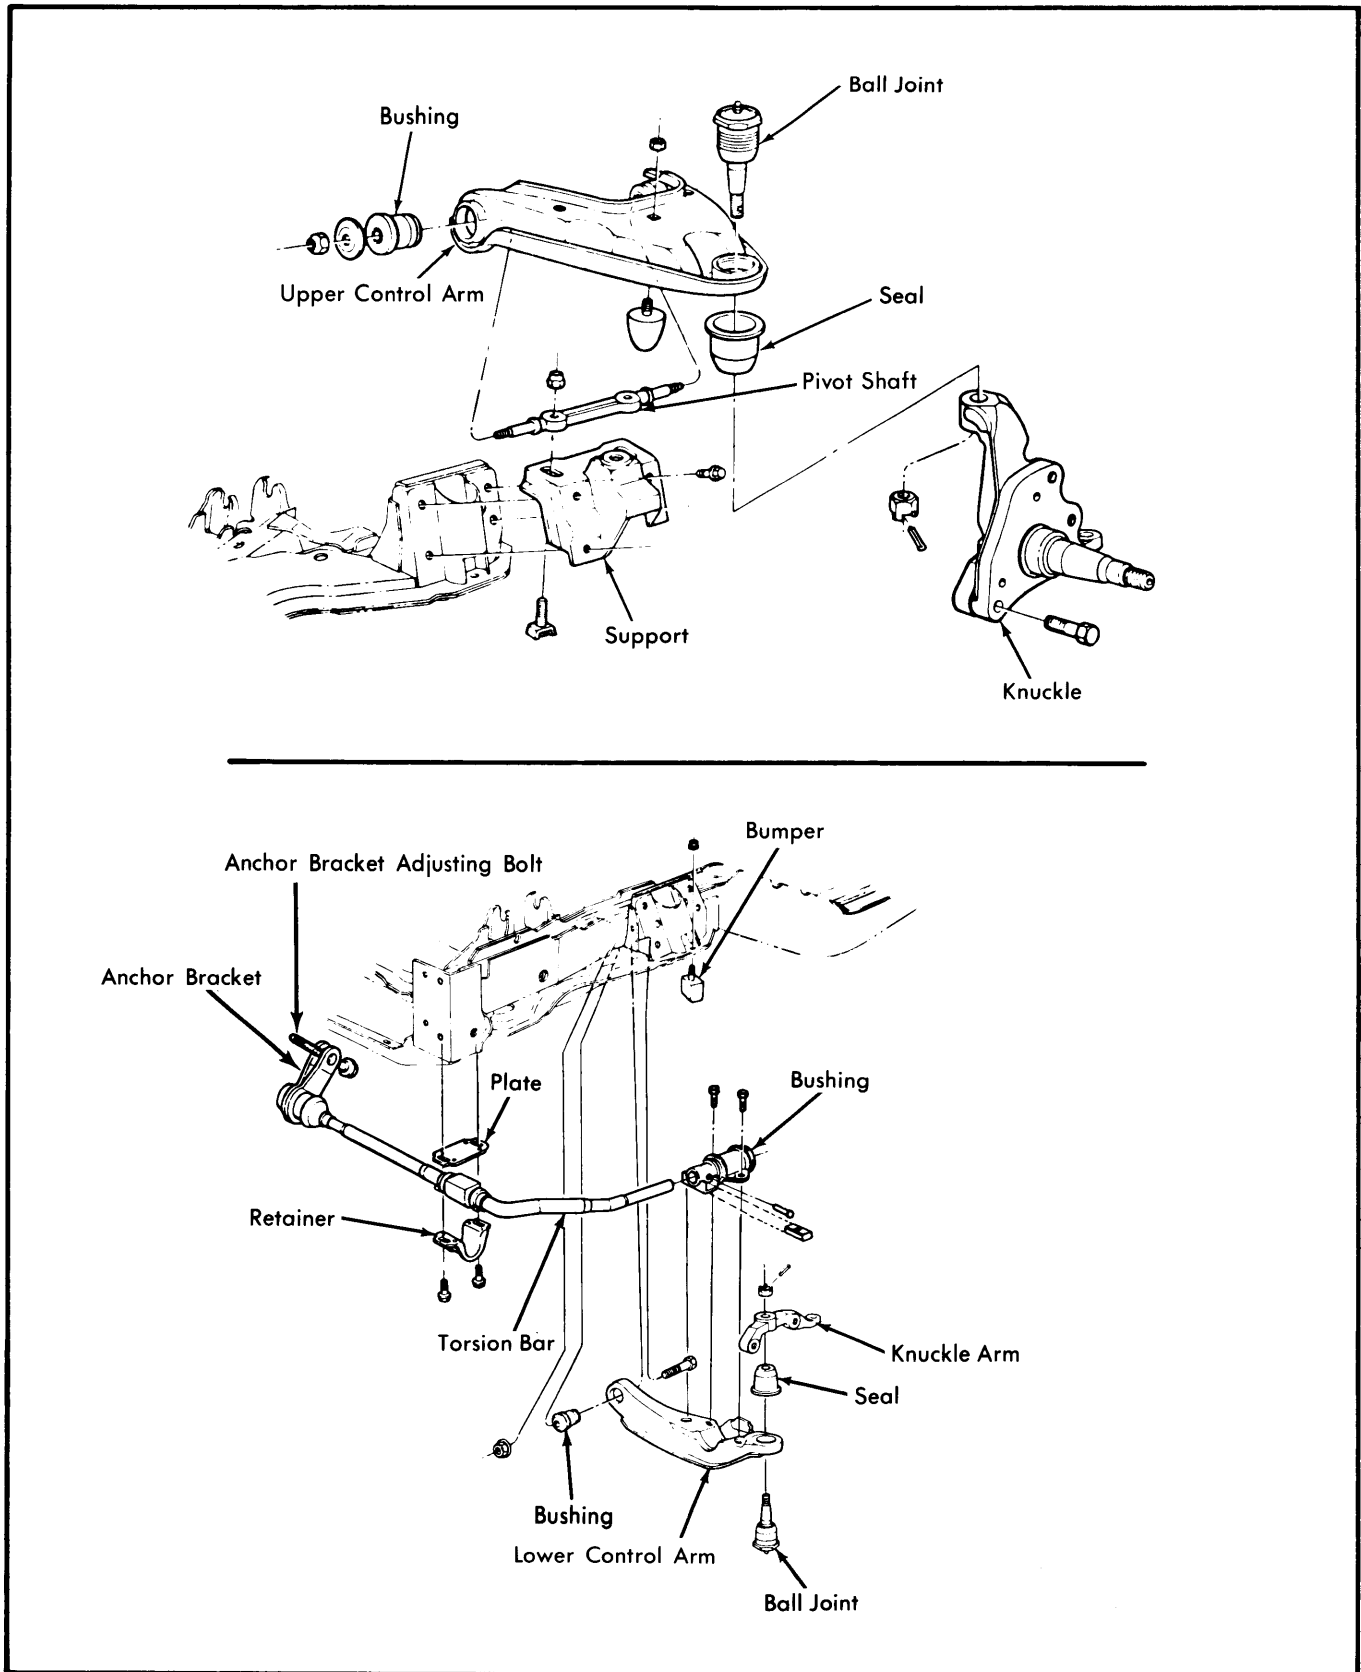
Exploded View of Chrysler Corp. Front Suspension (Rear Wheel Drive Models)
